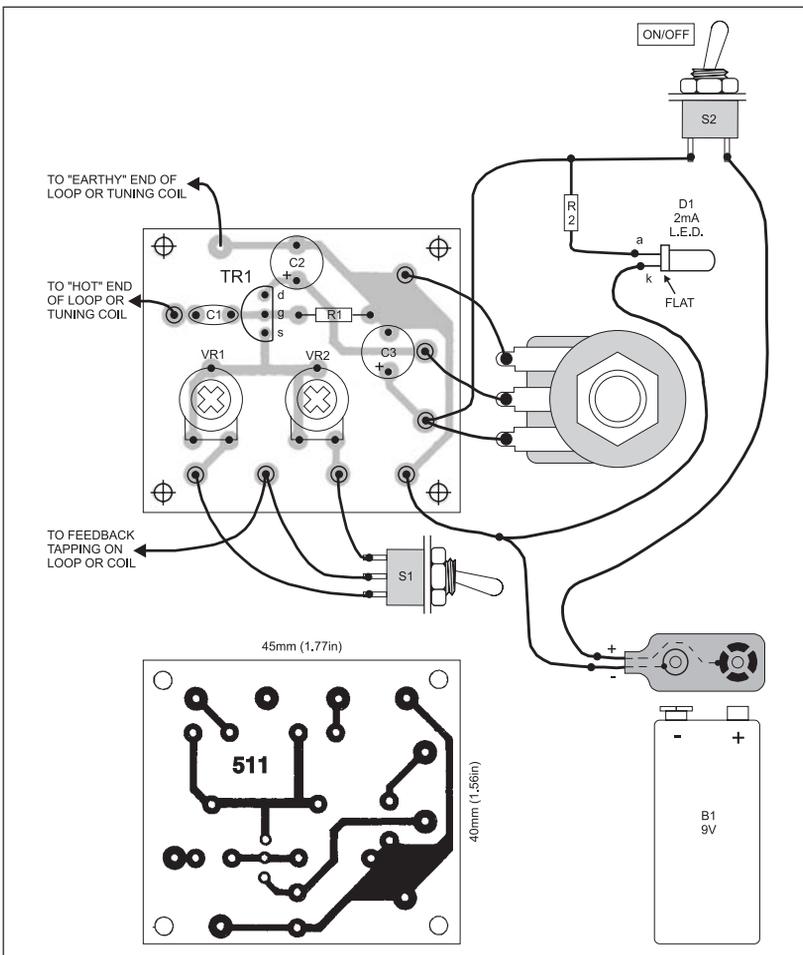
Q-Multiplier printed circuit board component layout, wiring to off-board components and full-size copper foil masters
